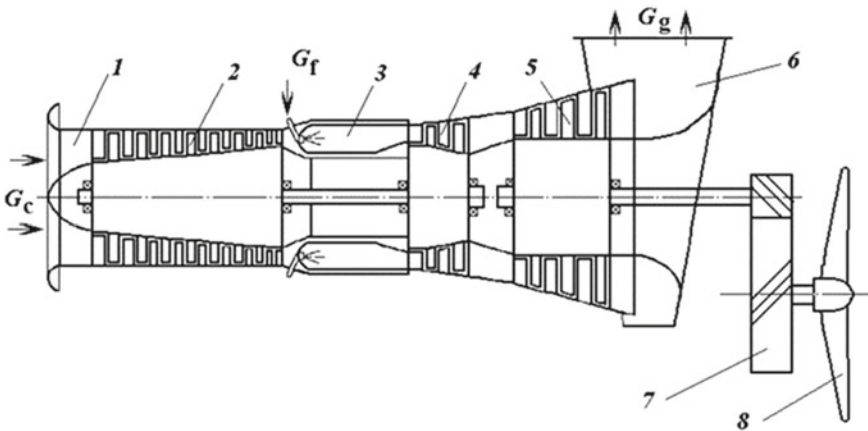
Ship gas turbine engine 1—air supply device; 2—compressor; 3—combustion chamber; 4—compressor turbine; 5—propeller turbine; 6—gas exhaust device; 7—gearbox; 8—propeller
